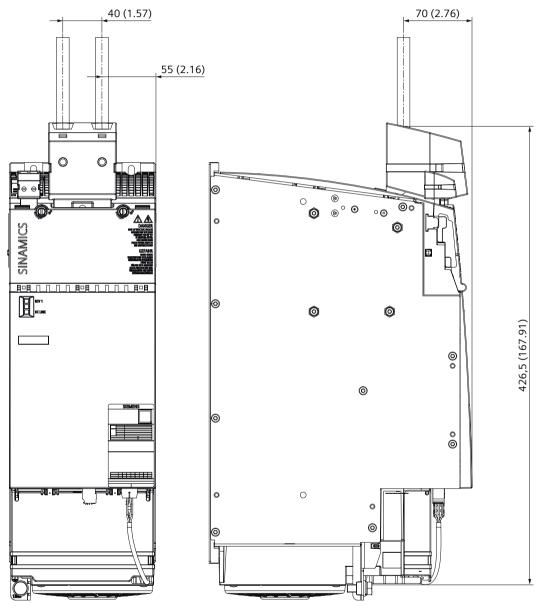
Dimension drawing of a 150 mm wide component (Motor Module) with 200 A DC link adapter, all dimensions in mm and (inch)
